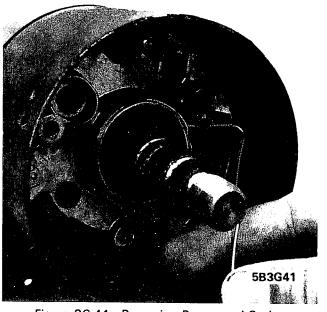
G-41 - Removing Buzzer and Spring Steps 1 thru 12 may be performed in the vehicle. If further disassembly is required, the column must now be
